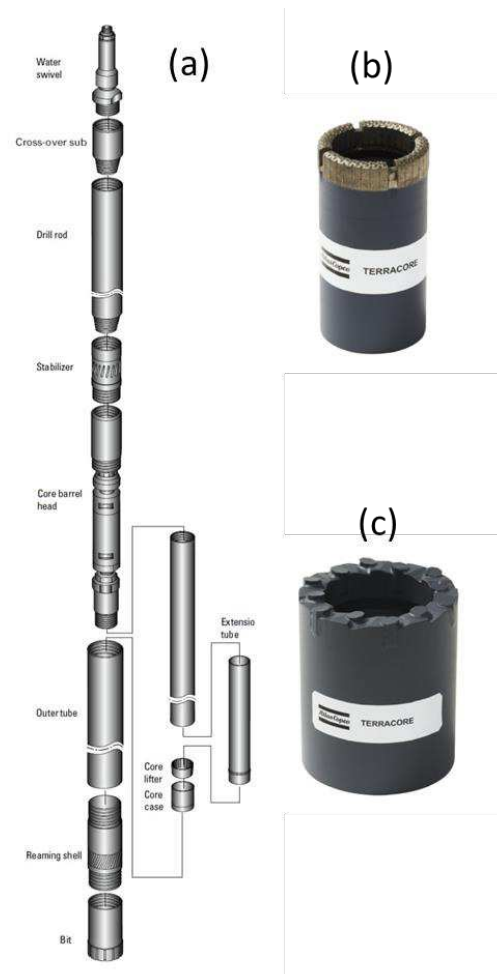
Atlas Copco 76 T2 core barrel (a) split drawing (b) surface set diamond drill bit (c) tungsten carbide drill bit (Source: Atlas Copco).
